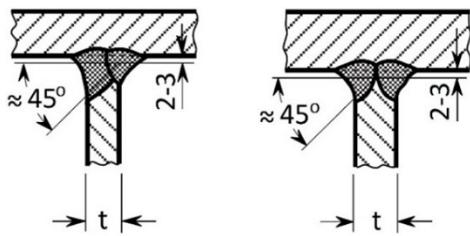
Single and double-bevel welds with full root penetration
